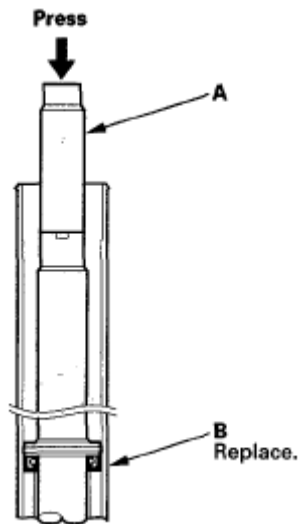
Identifying Appropriate Sized Deep Socket Onto Steering Rack
